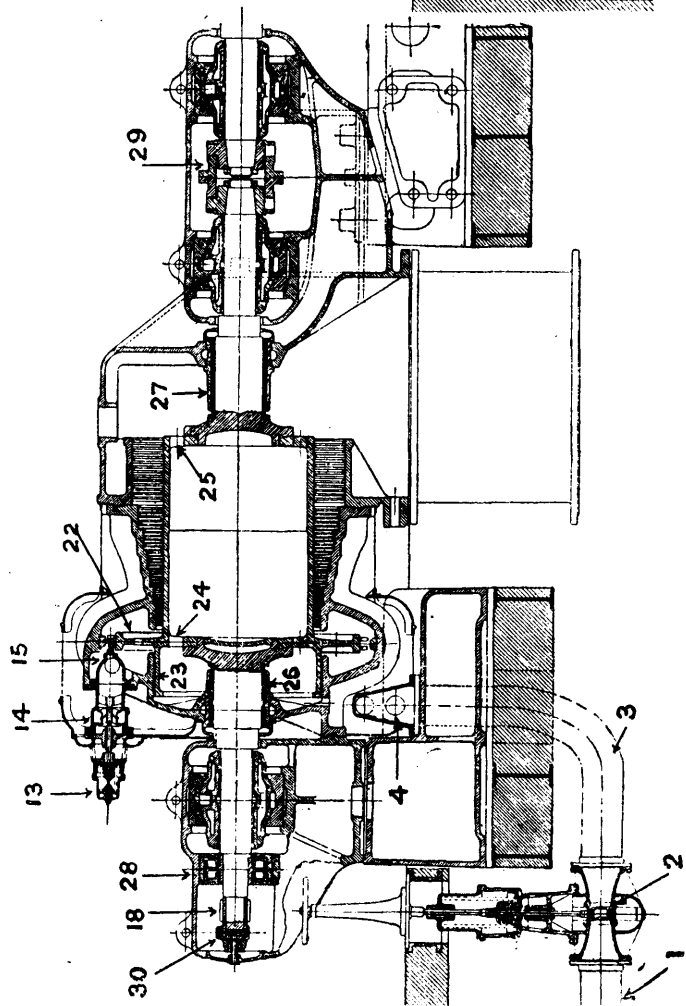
Franco Tosi Disc and Drum Turbine.
